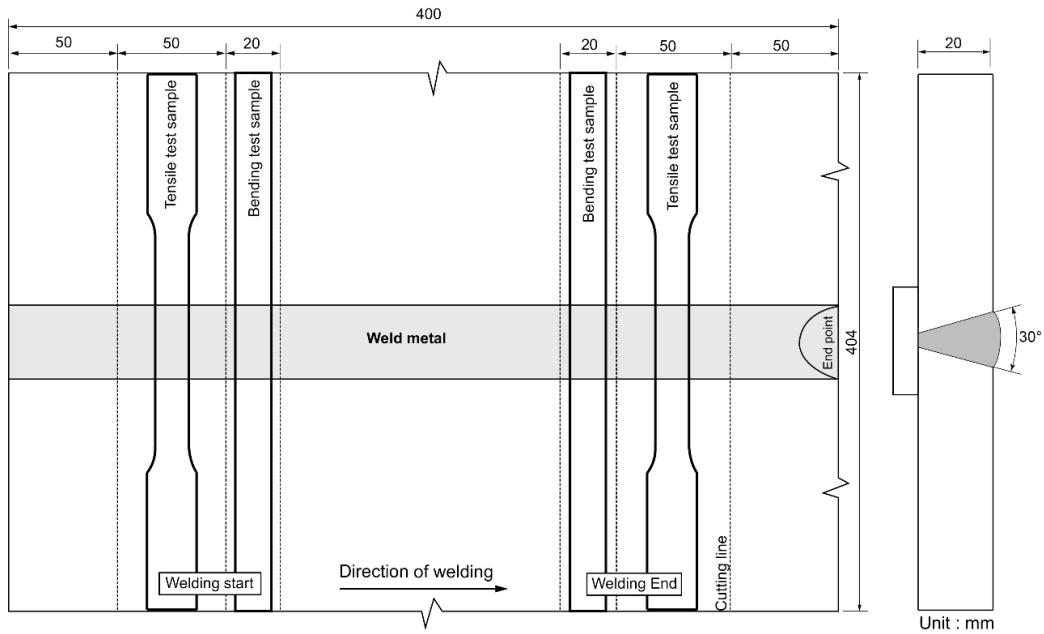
Schematic illustration of cut-off plan for tensile test and side bending test specimens.
